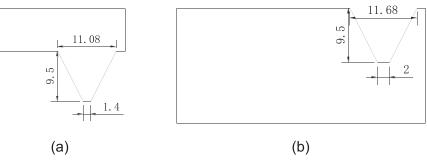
Geometry of shaping mould (unit: mm), (a) upper mould, (b) lower mould.
